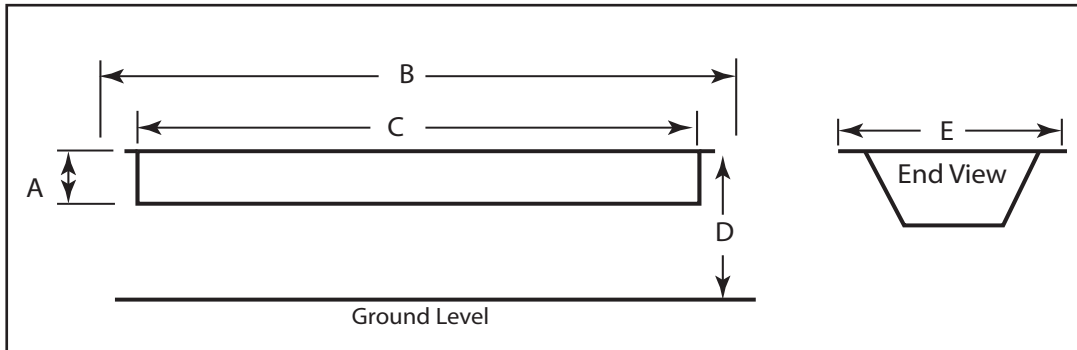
Linear Pan Dimensions; refer to Table 1.
